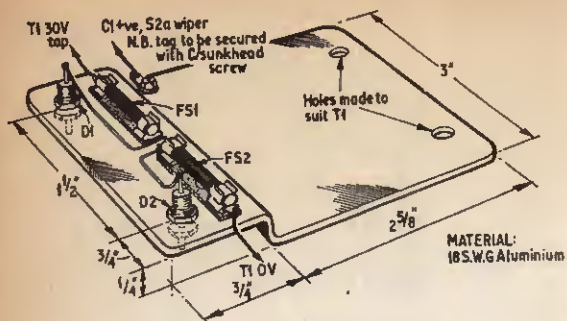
Details of the heatsink for D1, D2 which is mounted on top of transformer T1
